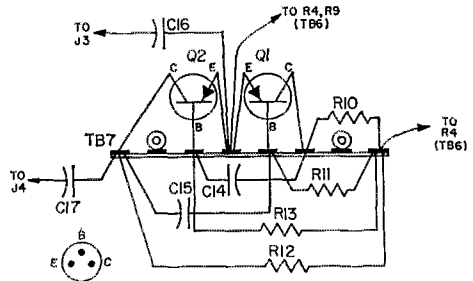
Sketch showing subassembly  $TB_7$  and external connections. (Terminal strip is H. H. Smith 870).
